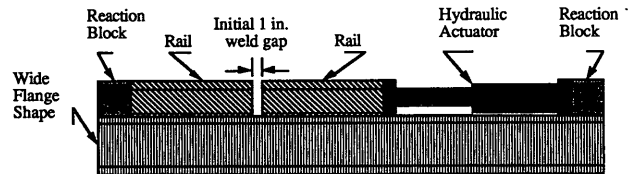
Schematic drawing of experimental weld fabrication apparatus.
